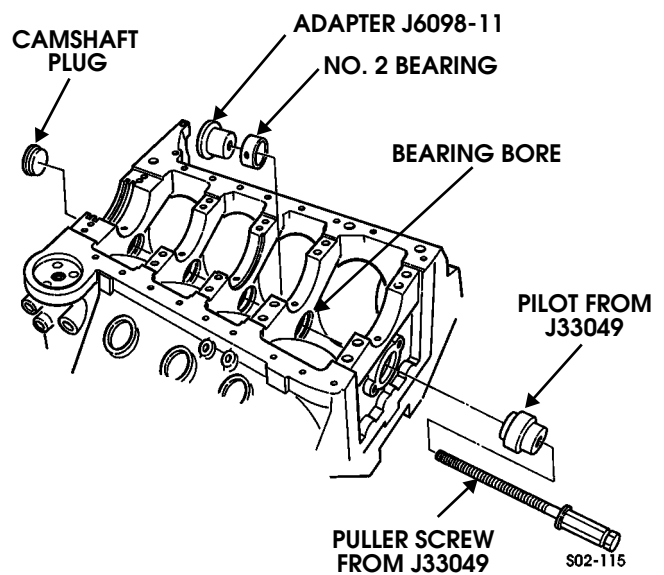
Installing Cam Bearings 2, 3, and 4
